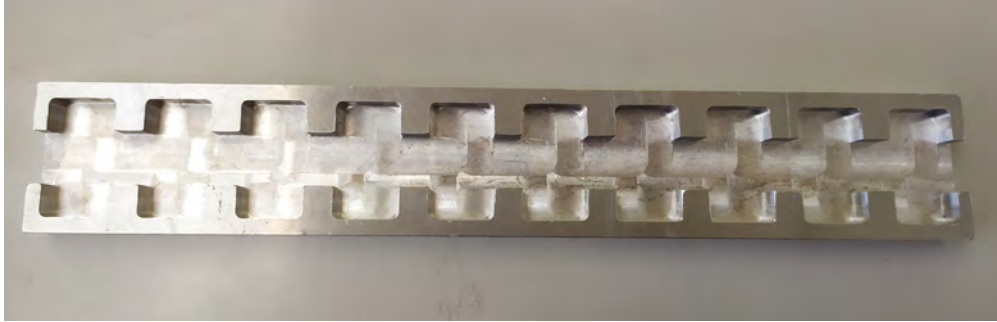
Aluminum cavity mechanized to fabricate the array.
